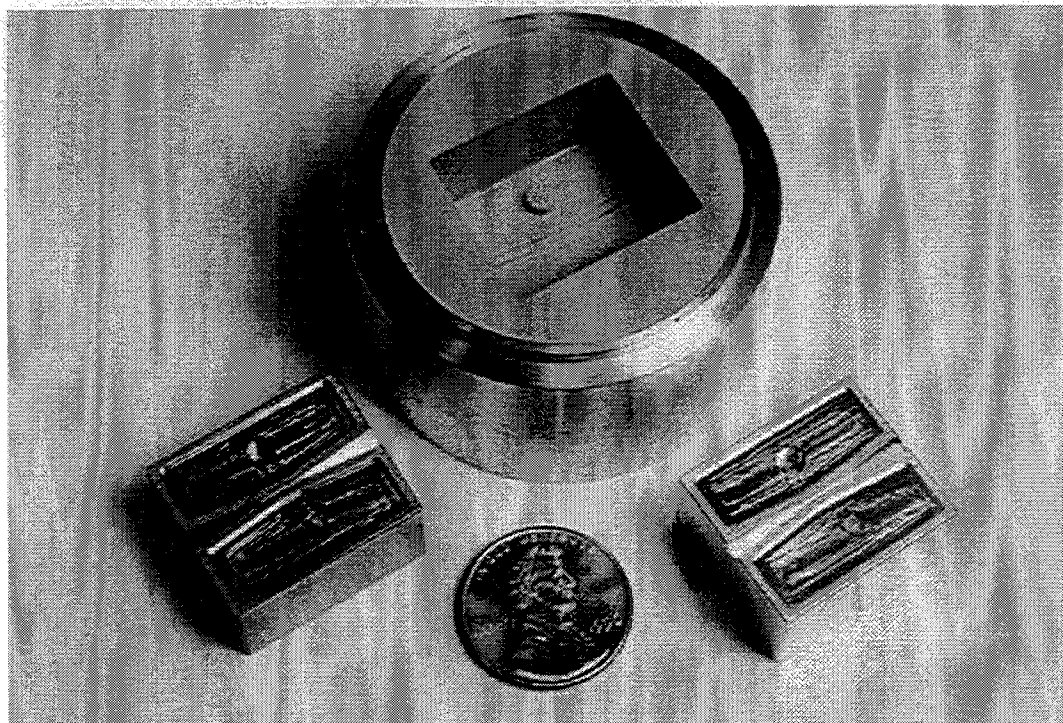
A photograph of a master (left), the silicone mold and a gold coated casting (right). The circuit is a 585 GHz waveguide and two diagonal horns.
